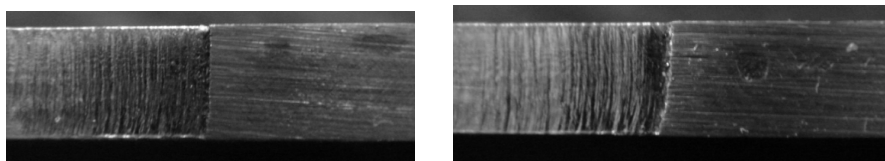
The cut front shapes for the rate of laser beam feed of 3000 mm/min (left) and 3800 mm/min (right)
